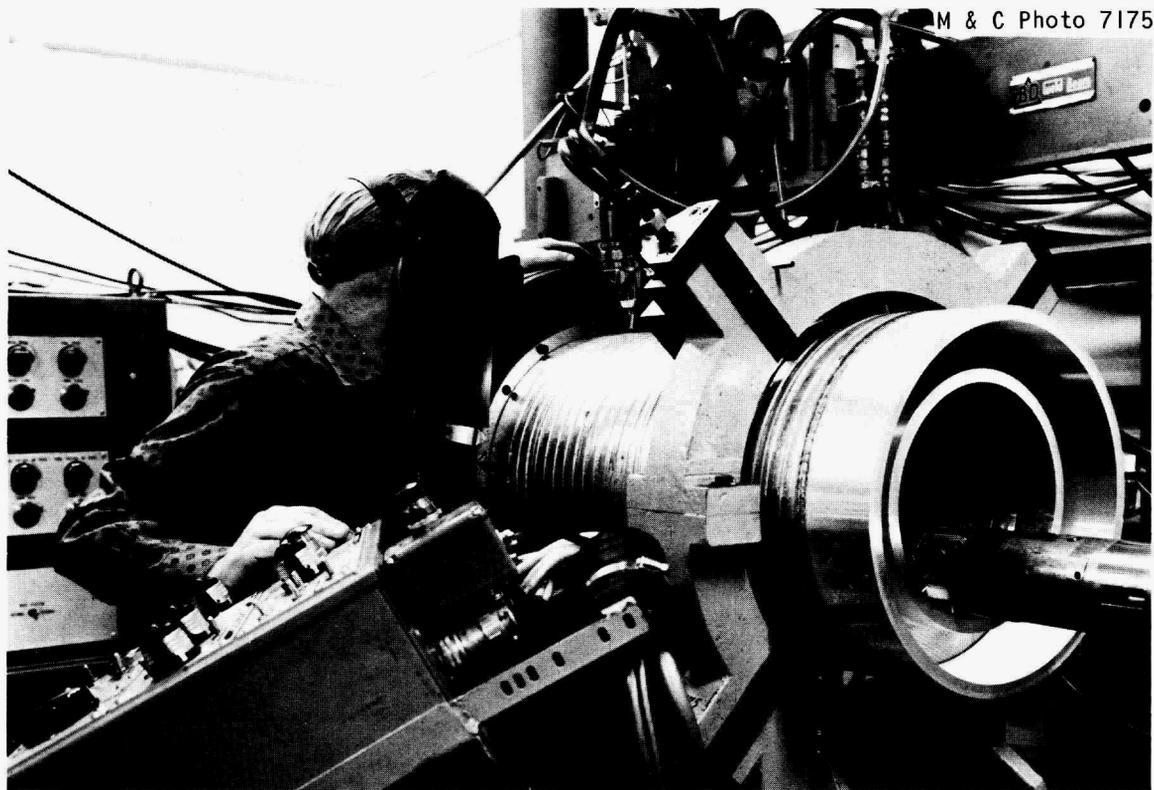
Adapter Welding on Outer Fuel Element.
